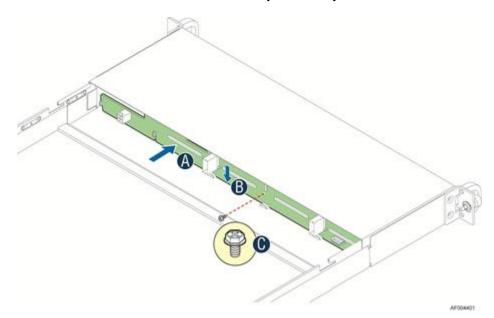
Installing 2.5" Drive Hot-Swap Backplane
